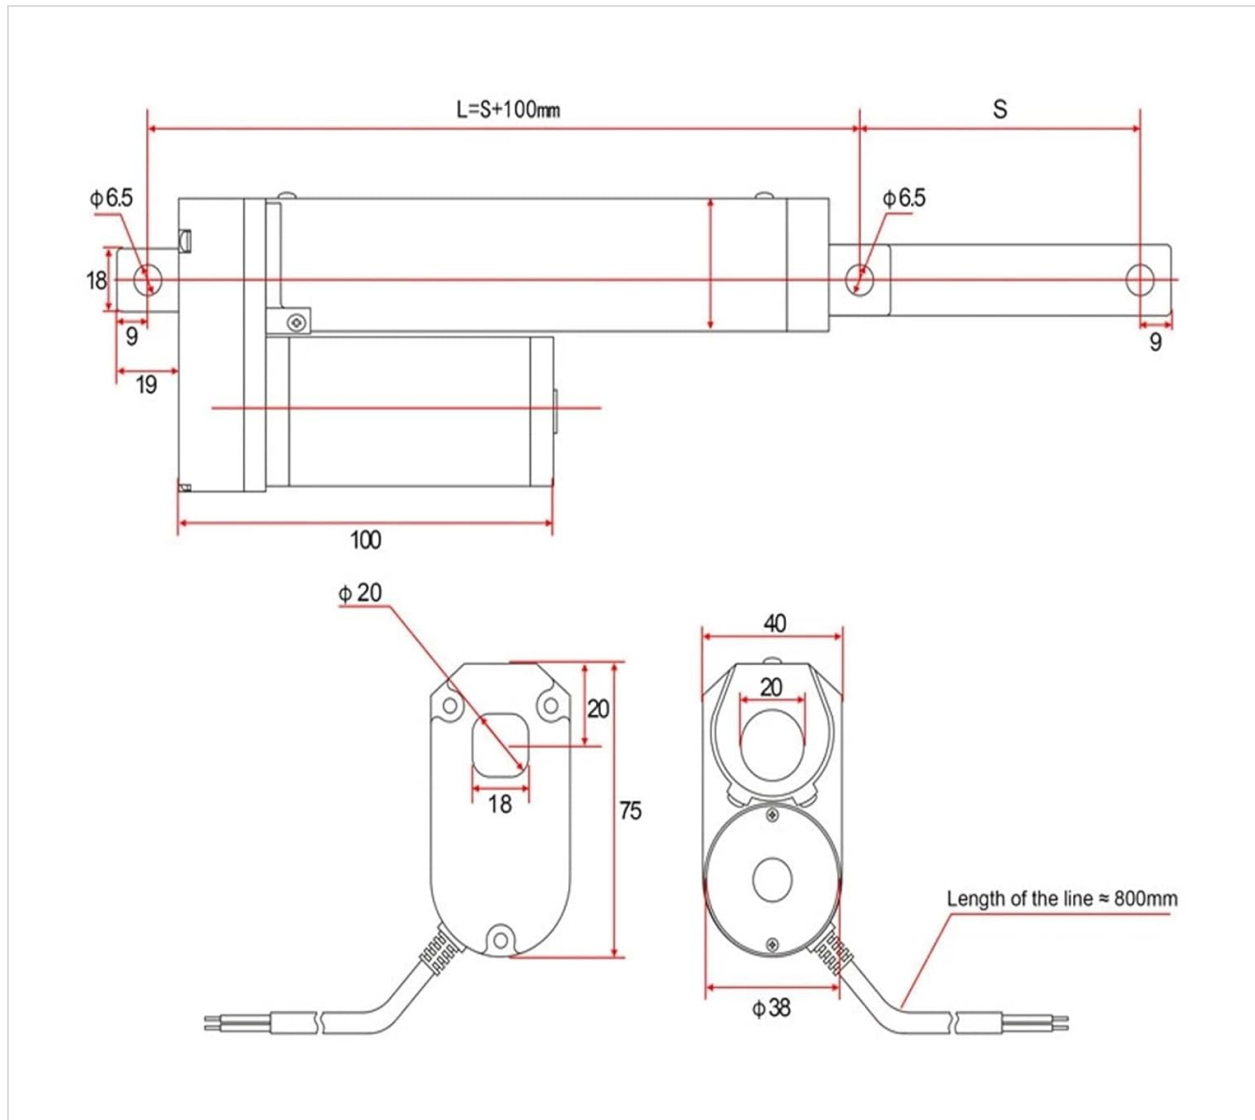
Dimensional drawing of the linear actuator, showing key measurements for mounting and integration. The retracted length (L) for a 50mm stroke is 155mm, and the extended length is 205mm.
